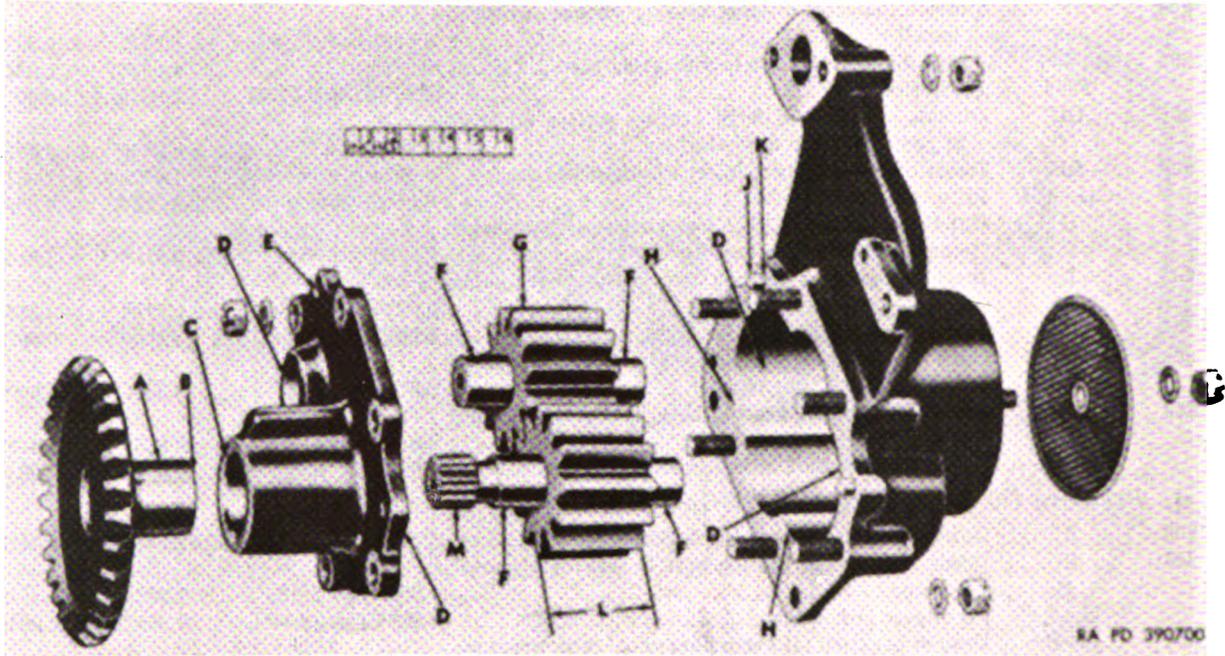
Repair and rebuild standard points of measurement for accessory case scavenger oil pump and drive gear.
